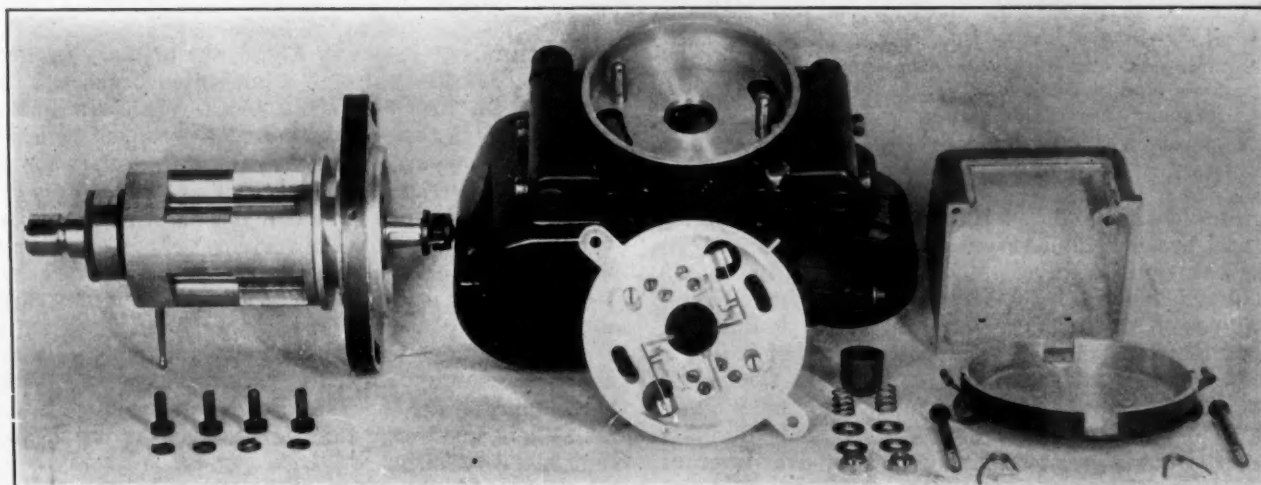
DISASSEMBLED PARTS OF SCINTILLA MODEL-SC DOUBLE MAGNETO
